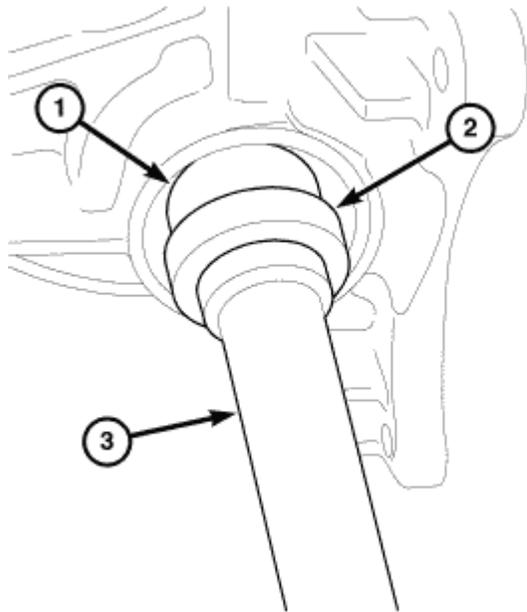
Positioning Bearing/Bushing In Housing Bore
